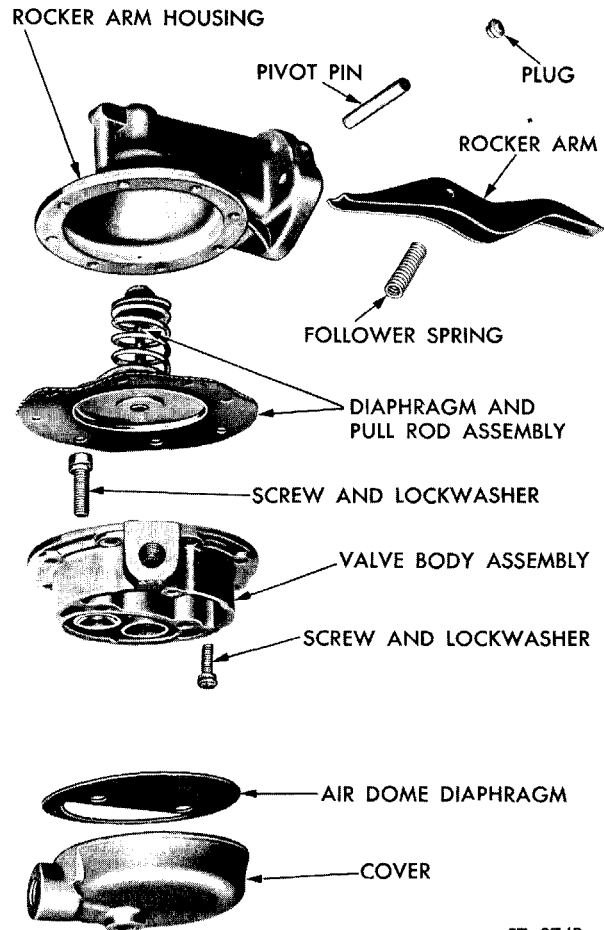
Fuel Pump (Exploded View M-2611S (Car Cooling)
